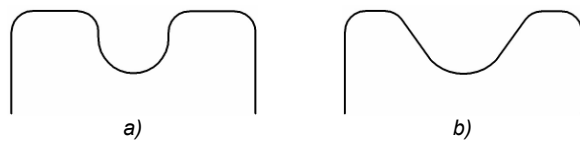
a) Initial roller groove shape. b) Proposed adjusted roller groove shape.
